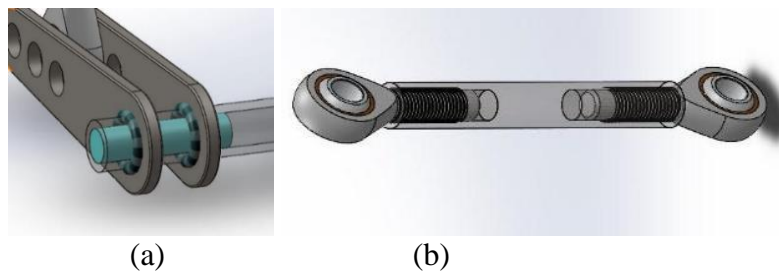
(a) Welded-in material, (b) Vertical rod with heim joints
